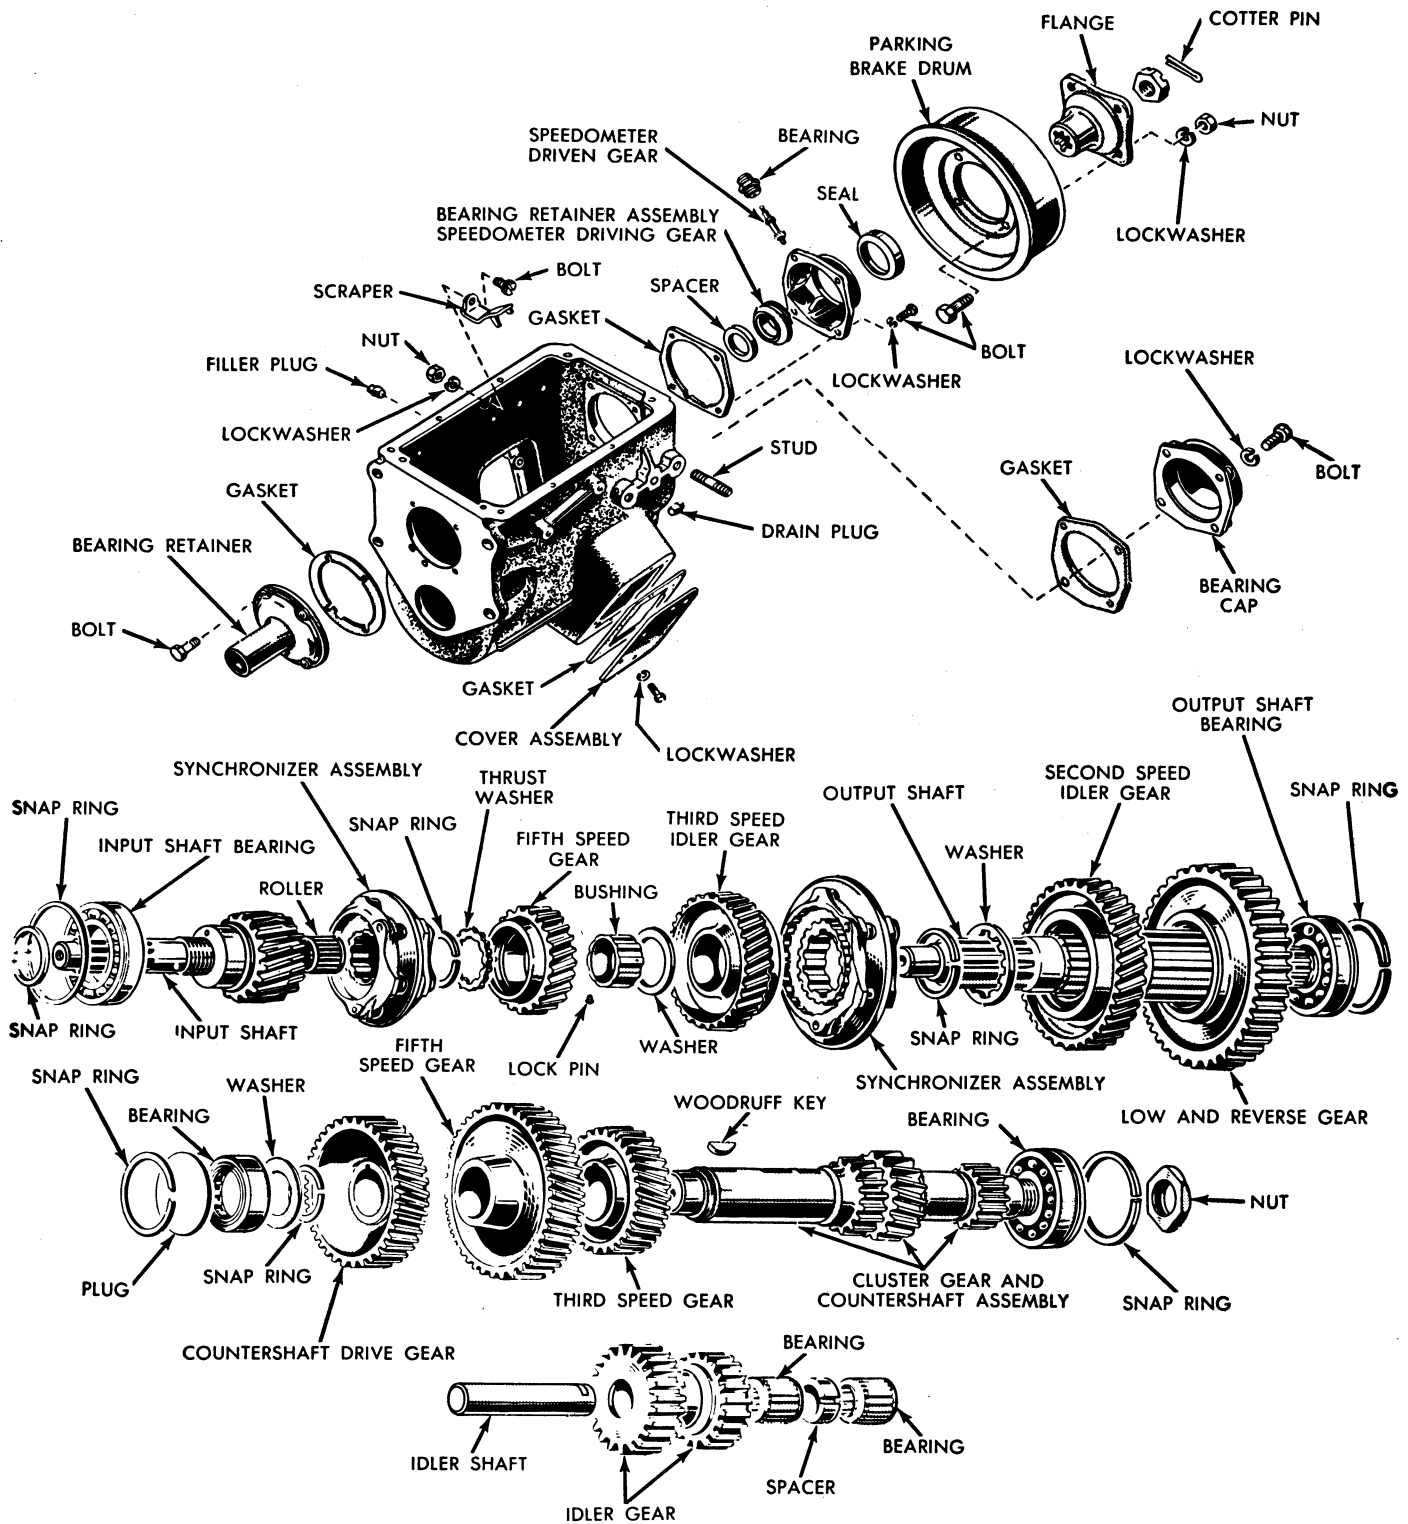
Clark five speed transmission. Models 265, 267, 300
